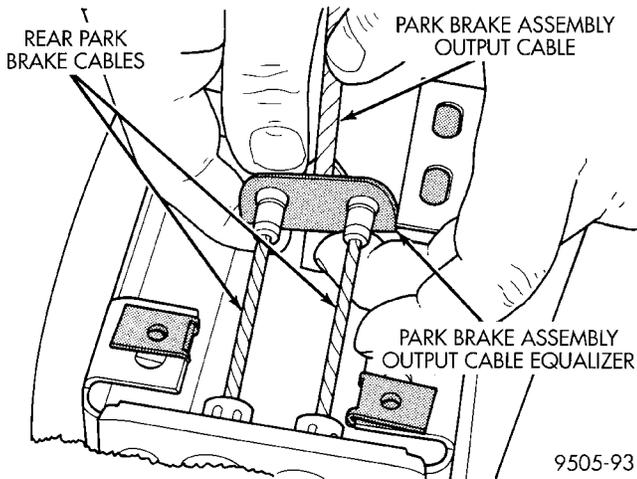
Rear Park Brake Cable Installation On Equalizer
